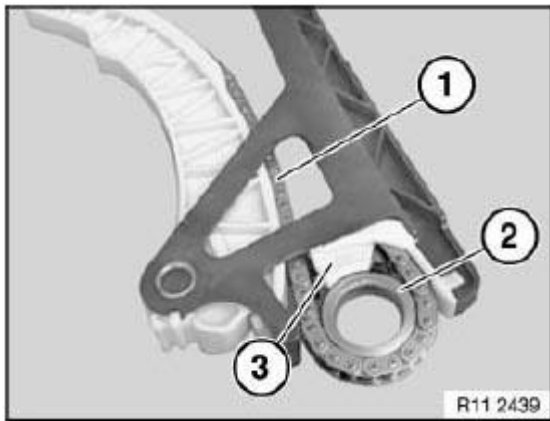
Timing Chain, Sprocket Wheel And Chain Guide
